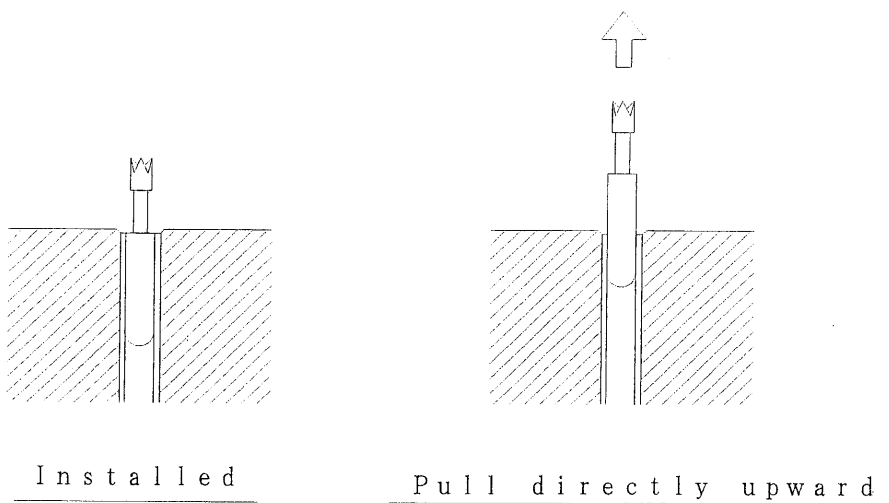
Replacing the electrical contacts of the Tooling Adaptor
